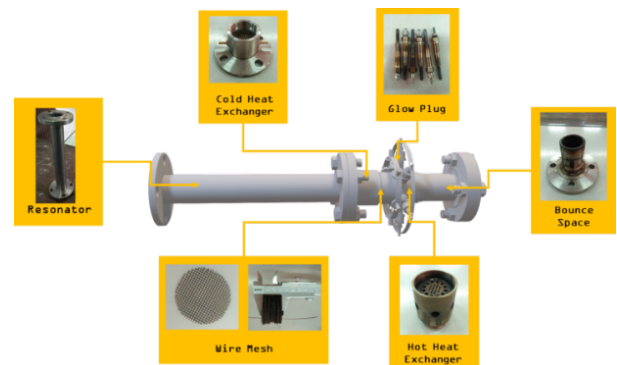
Schematic diagram of a close-open thermoacoustic engine
